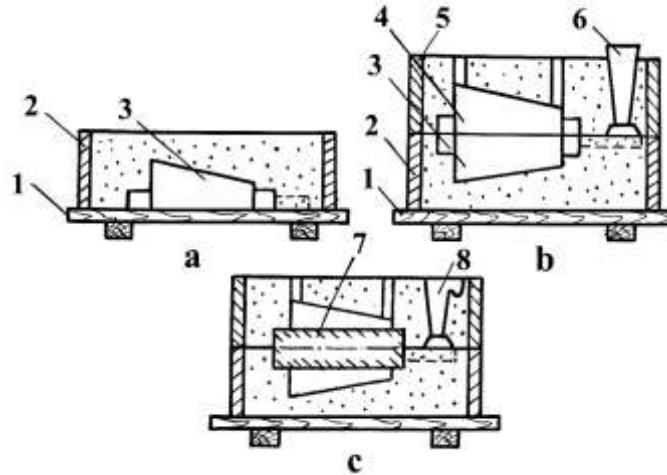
Moulding process: a-drag moulding; b-cope moulding; c-assembled mould:
